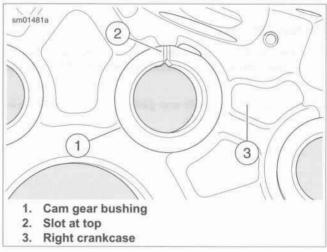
Cam Gear Bushing Installed in Crankcase
